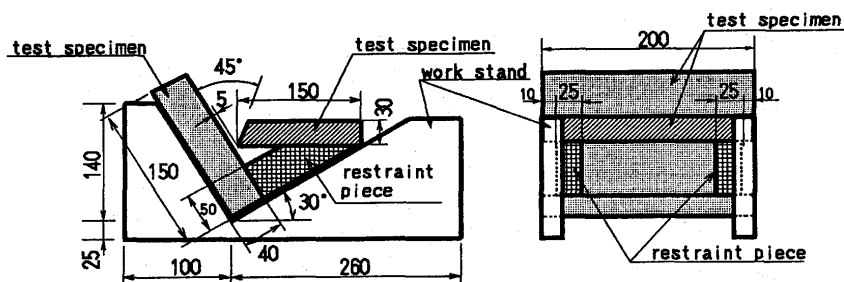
Testing apparatus and its size of multi-layer welds with single-bevel groove to simulate a folding.
